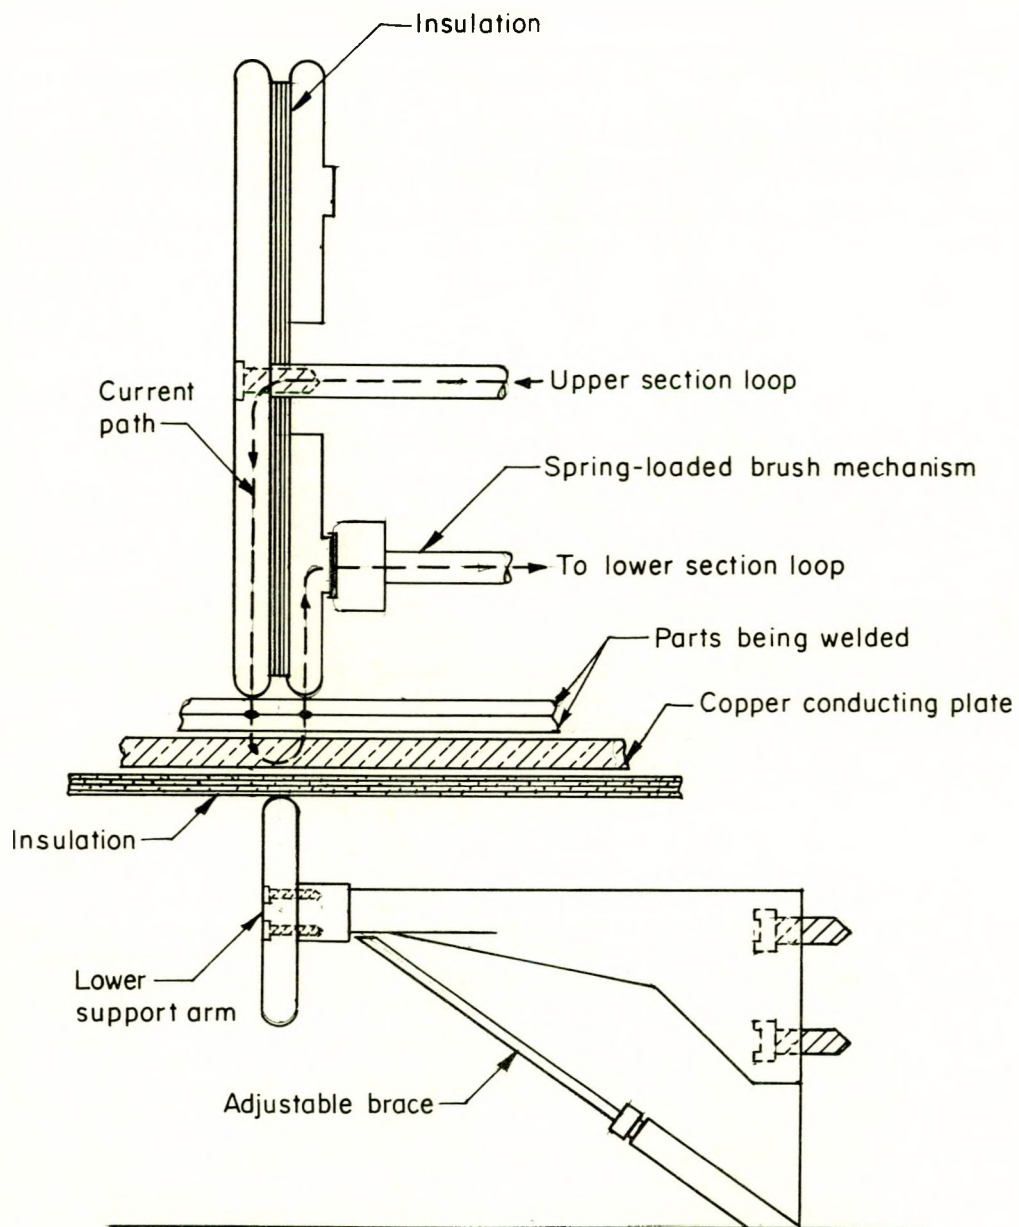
MACHINE ARRANGEMENT FOR SERIES SEAM WELDING (Ref. 60)
